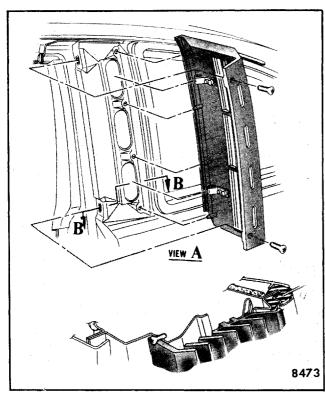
Louver Assembly - X-17 and X-27 (standard roof) Styles
